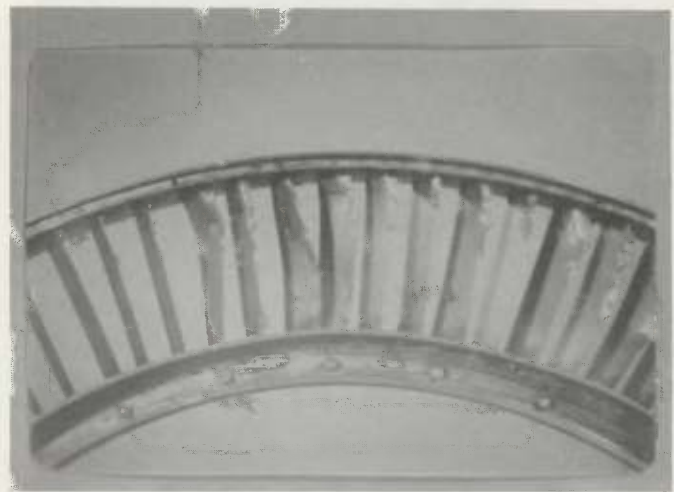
Damaged stator vane assembly. Vanes must be replaced
